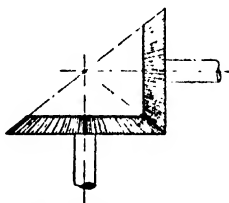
This represents bevel gearing, in which one wheel turns another in a different direction altogether.
